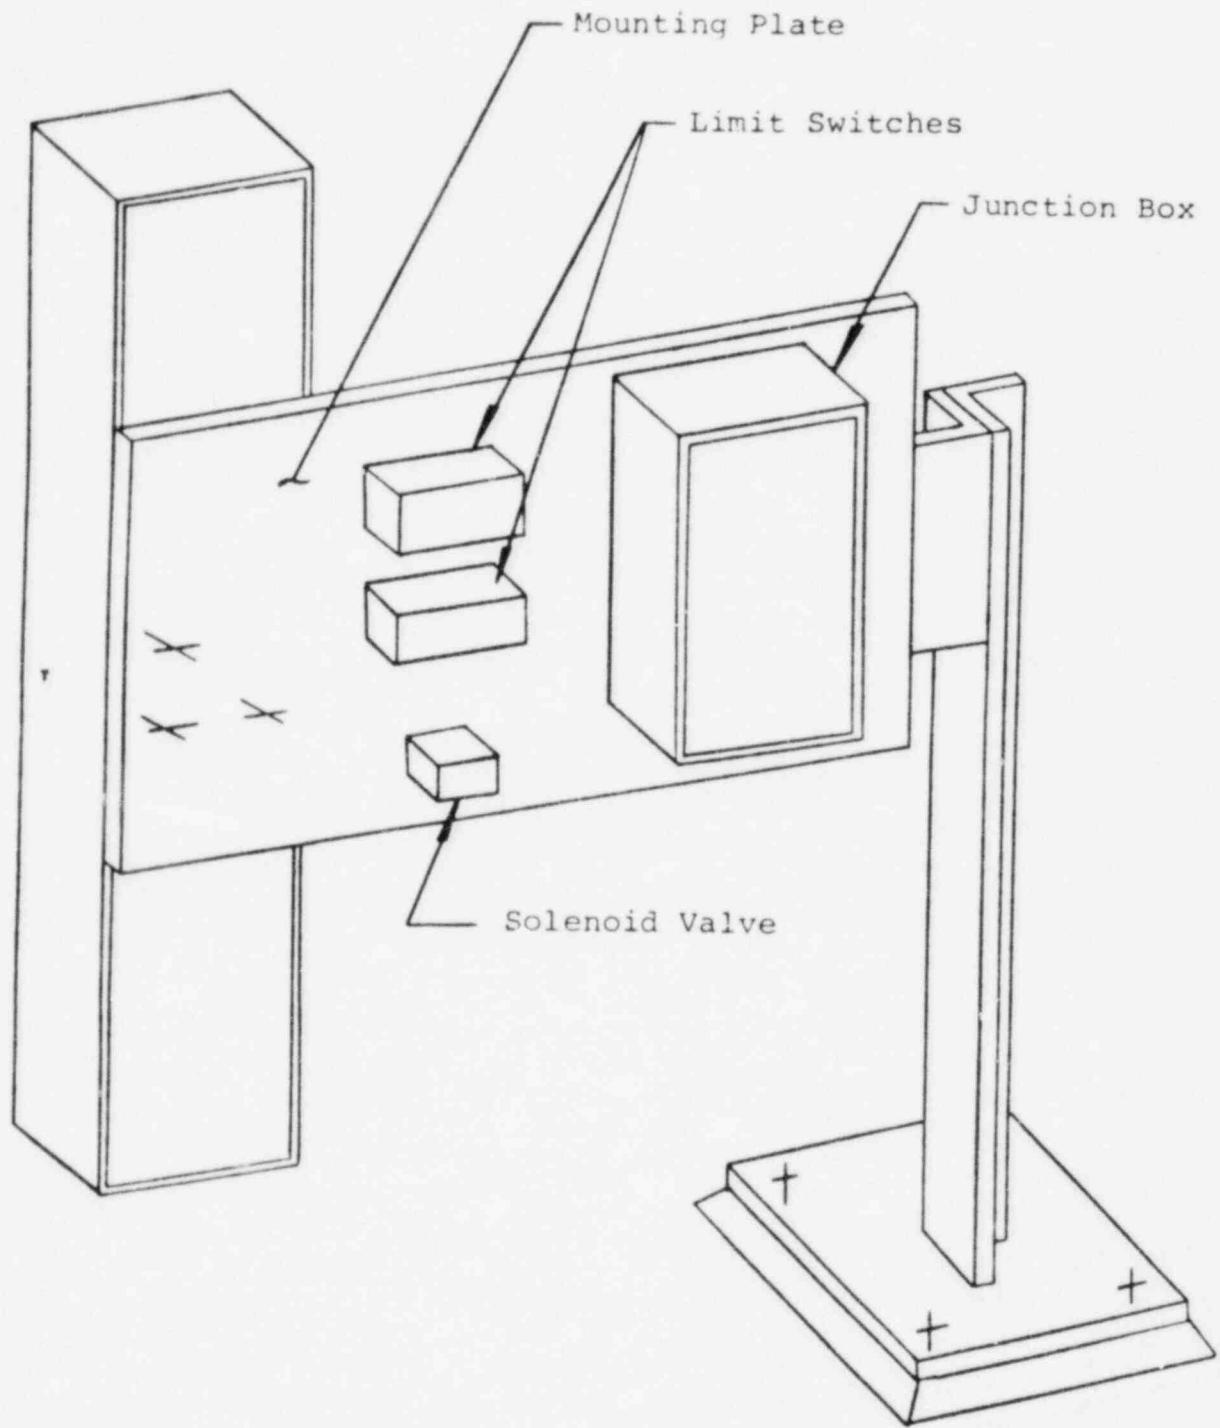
General Configuration, Solenoid Valve Mounting Plate
